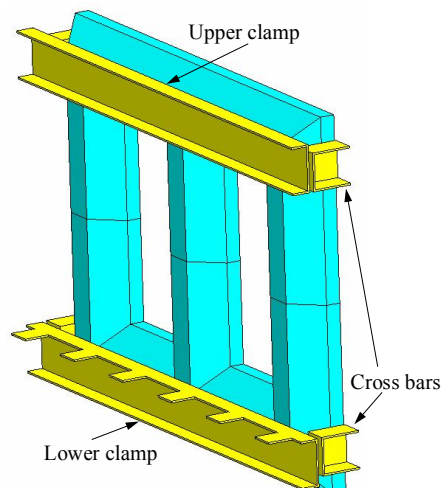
One half of transformer core with lower clamps, upper clamps and crossbars.
